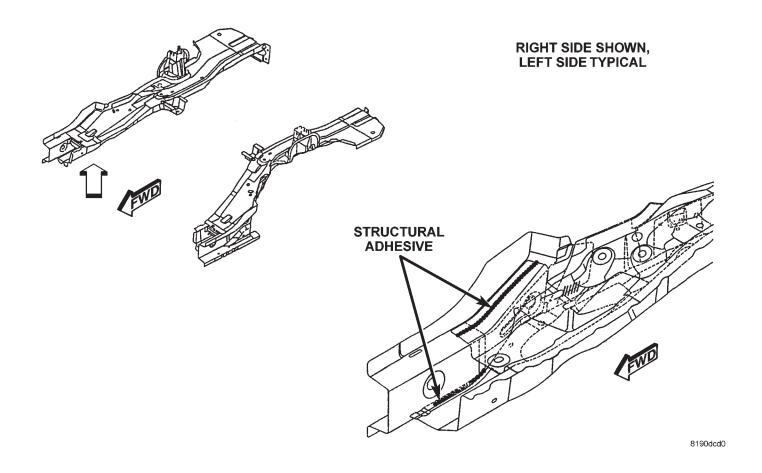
SIDEMEMBER ASSEMBLY (1 OF 3)
